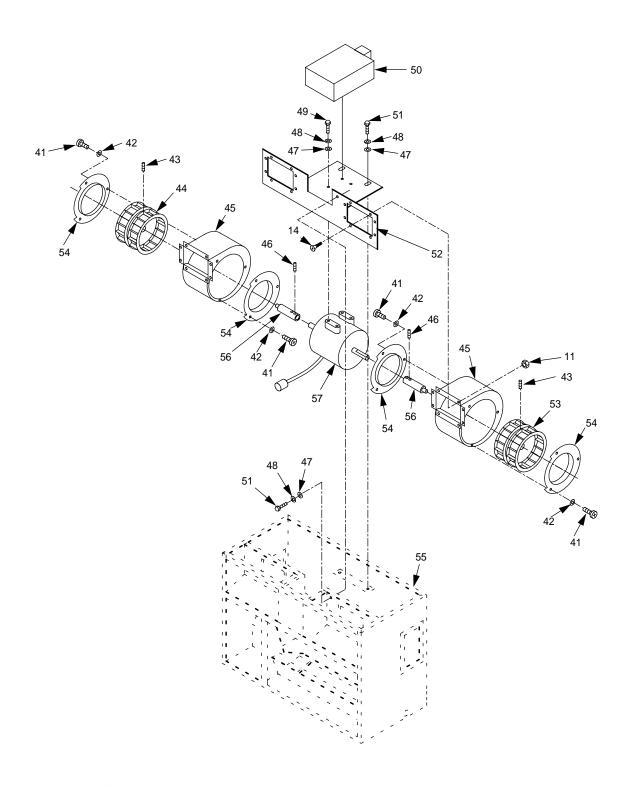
Evaporator Assembly (Sheet 3 of 4)
